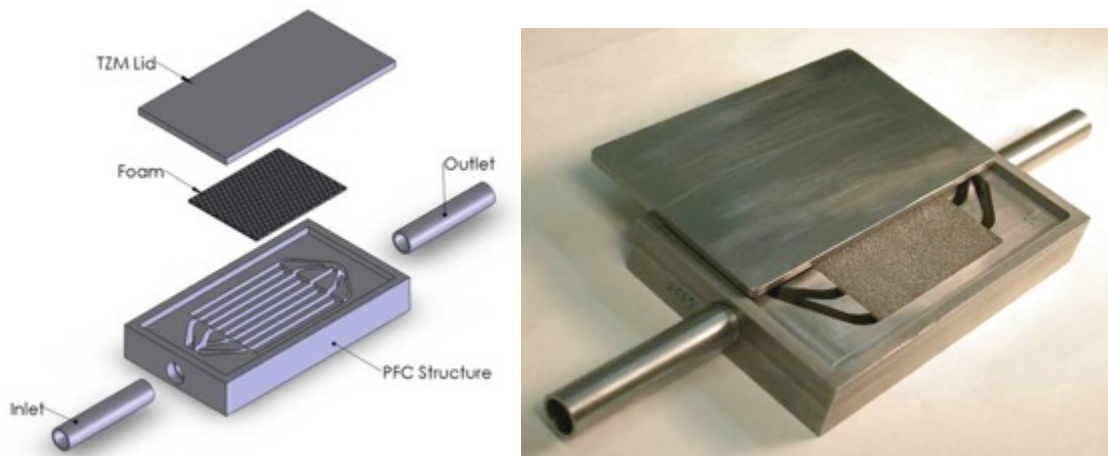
Multi-channel helium-cooled TZM/Moly heat sink with moly foam: 3D CAD (left panel) and fabricated test device (right panel)⁵
